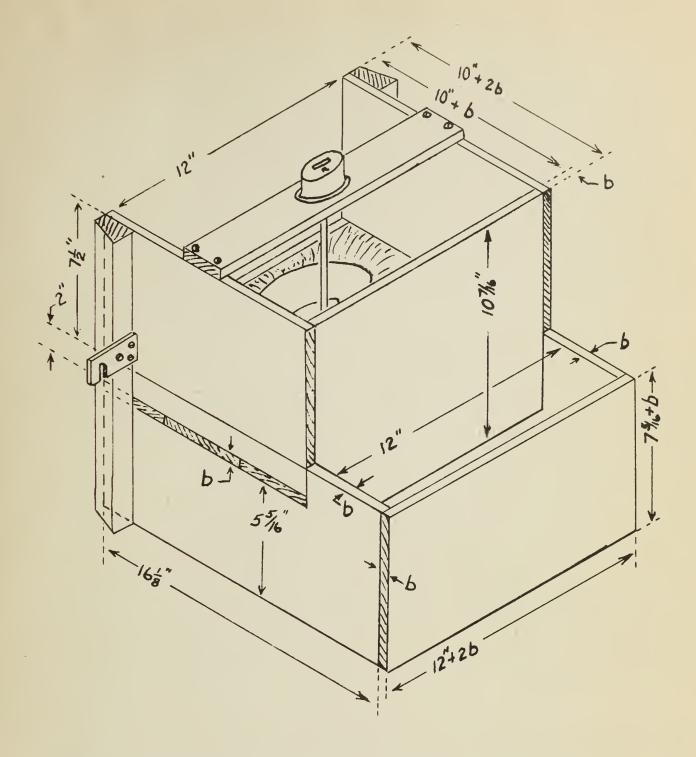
The assembled meter shown in detail. Figures 3 and 4 show details of the component parts.
